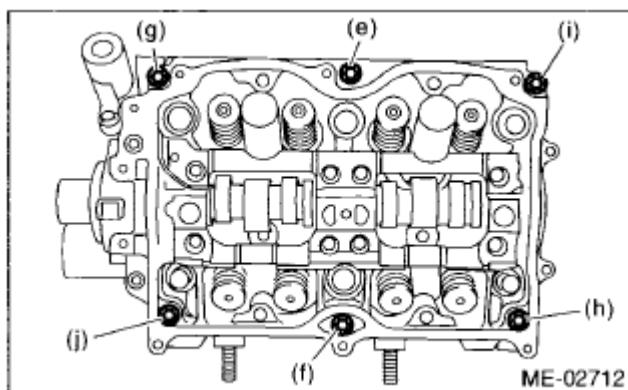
Identifying TORX® Bolts Tighten Sequence
